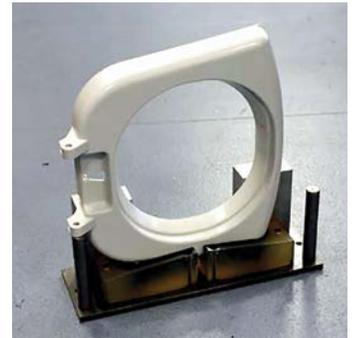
Assembly fixture printed with rigid and rubbery features (FC720 and TangoBlack).
